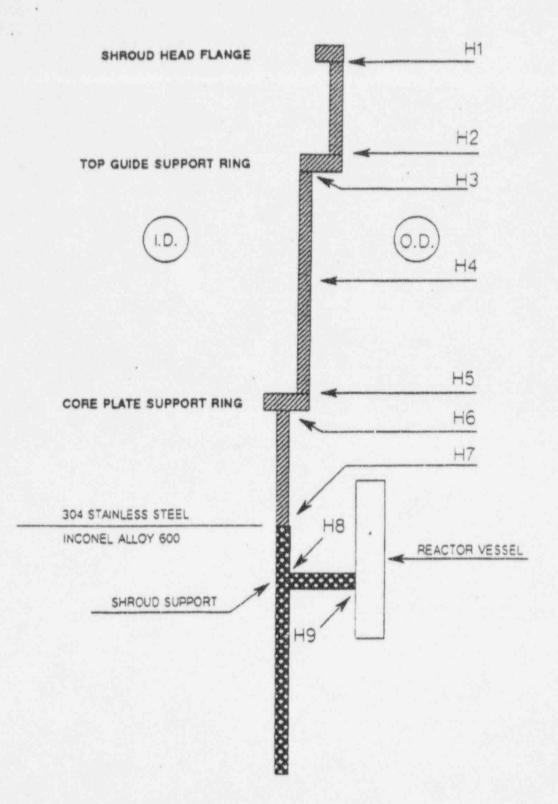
HORIZONTAL WELD LOCATIONS
